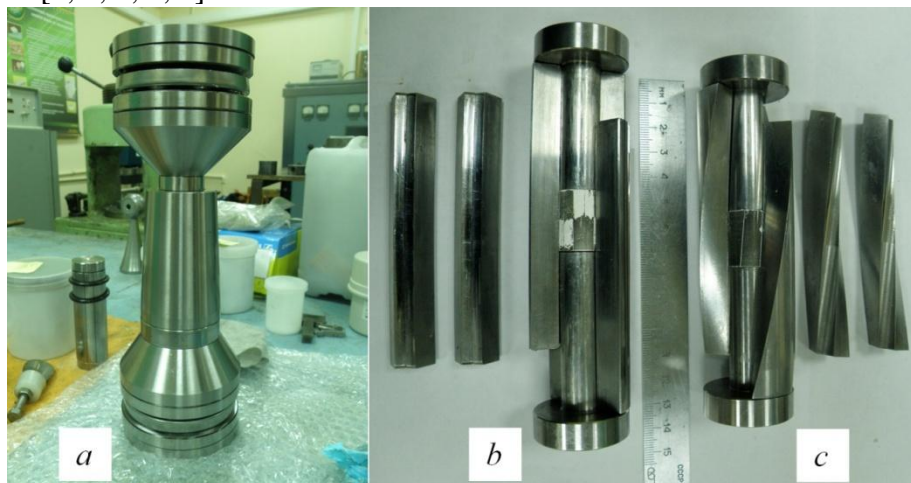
Ultrasonic mold of cylindrical body: (a) – collector mold of spiral type (Novel mold), (b) – passive component set for collector mold, (c) – passive component set for collector mold of spiral type
